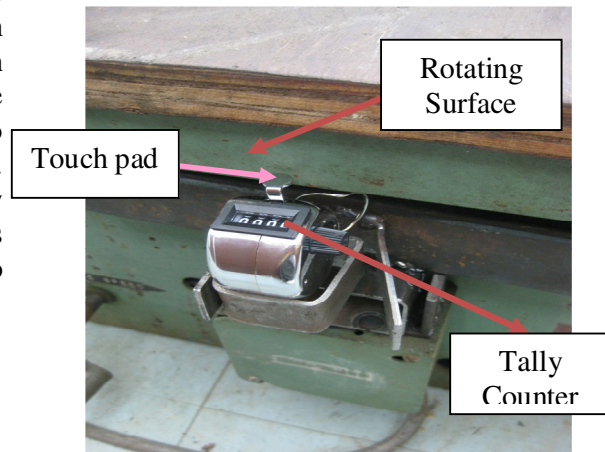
A tally counter attached to the bottom of the rotating surface of the machine.
